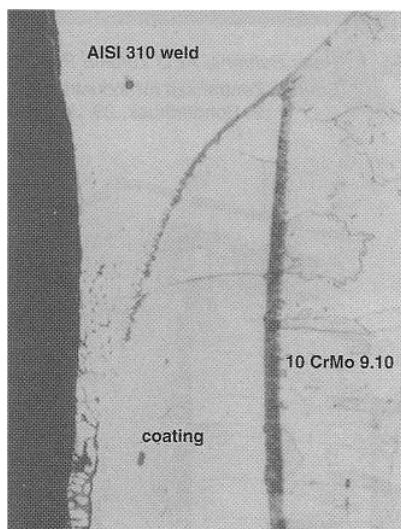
Cross-section of the welded coating shows that no cracking occurs.
